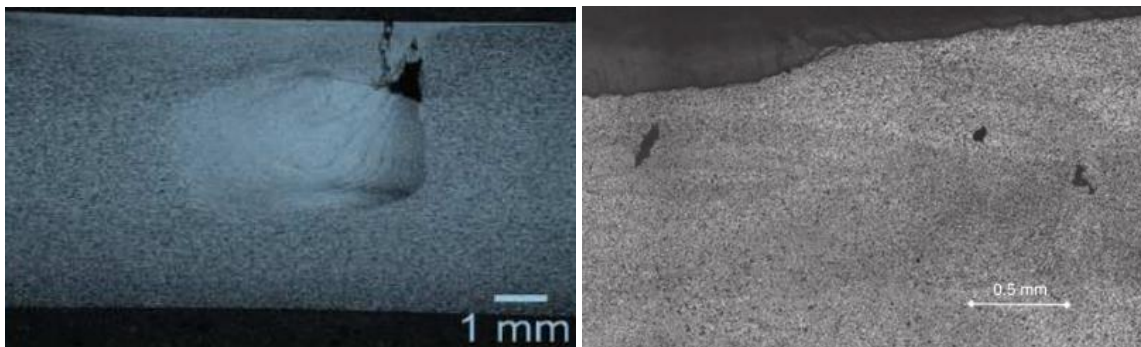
Example of Voids formed in Friction Stir Welds
